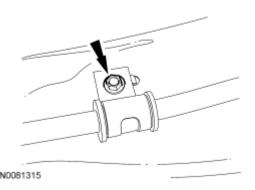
Identifying LH Halfshaft Courtesy of FORD MOTOR CO.
